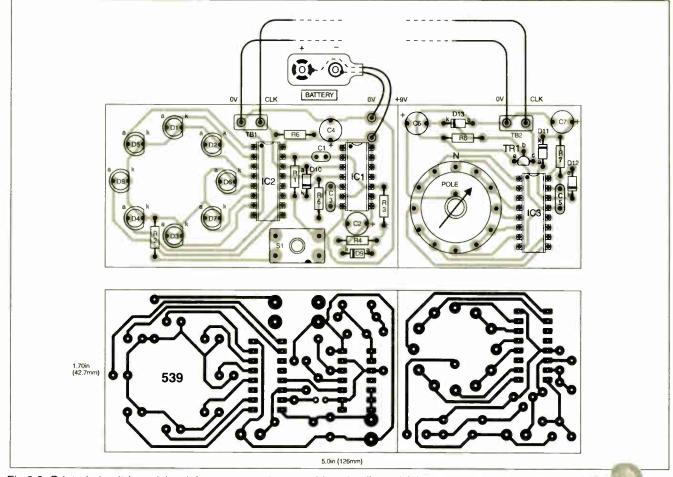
Printed circuit board (p.c.b.) component layout, wiring details and full-size copper track master for the Electronic Weather Vane. The p.c.b. is cut into two sections making up the Display and Vane boards – see below
